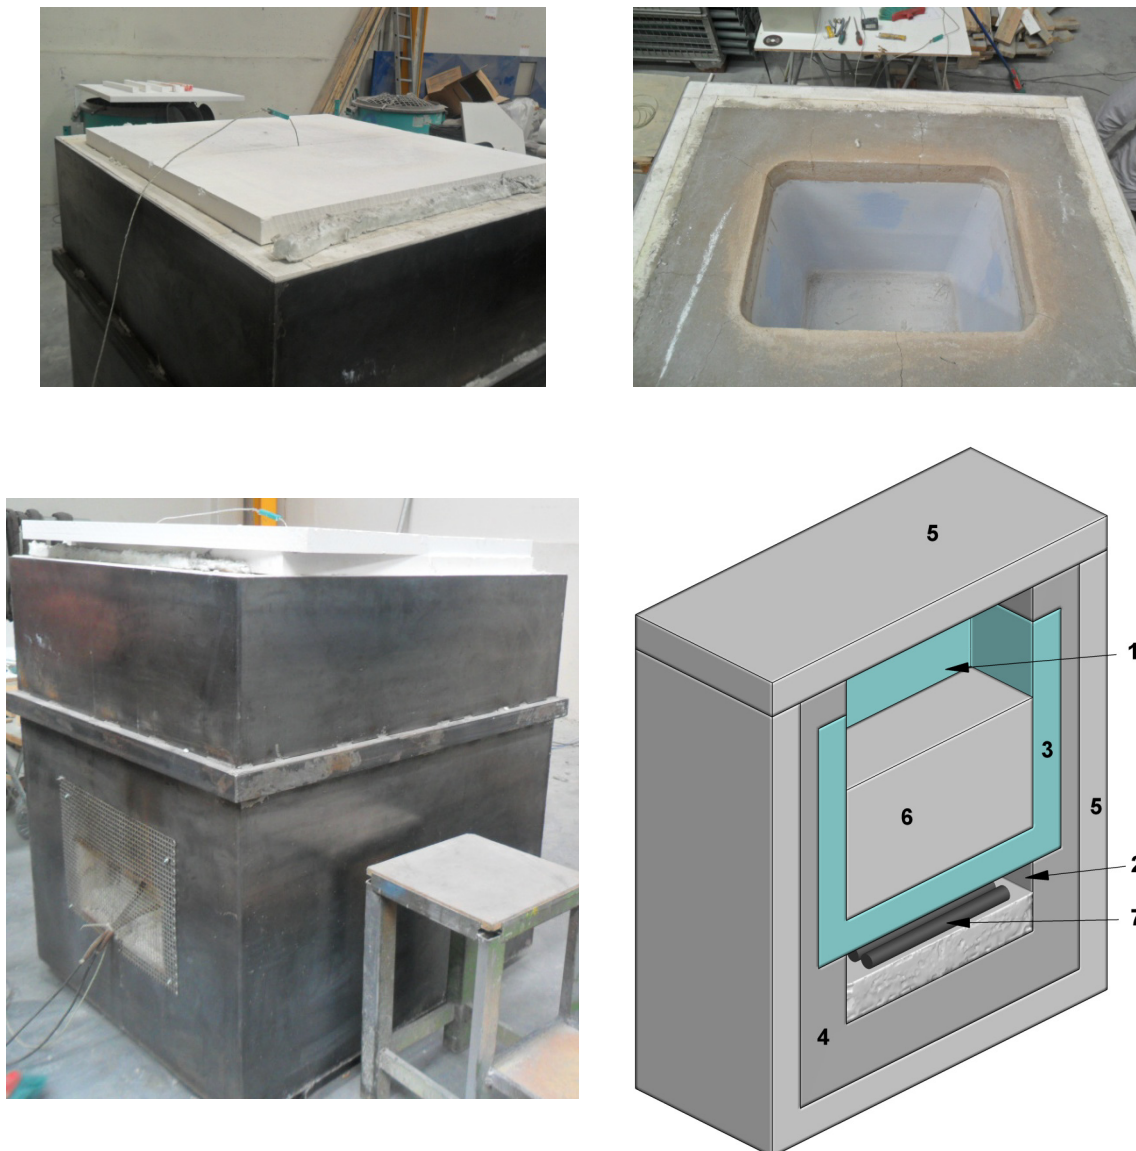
Photographs of the aluminum holding furnace and sectional view (1-holding chamber, 2-heating chamber, 3-layer of refractory material A, 4- layer of refractory material B, 5- layer of refractory material C, 6- aluminum load, 7- electrical resistances)
